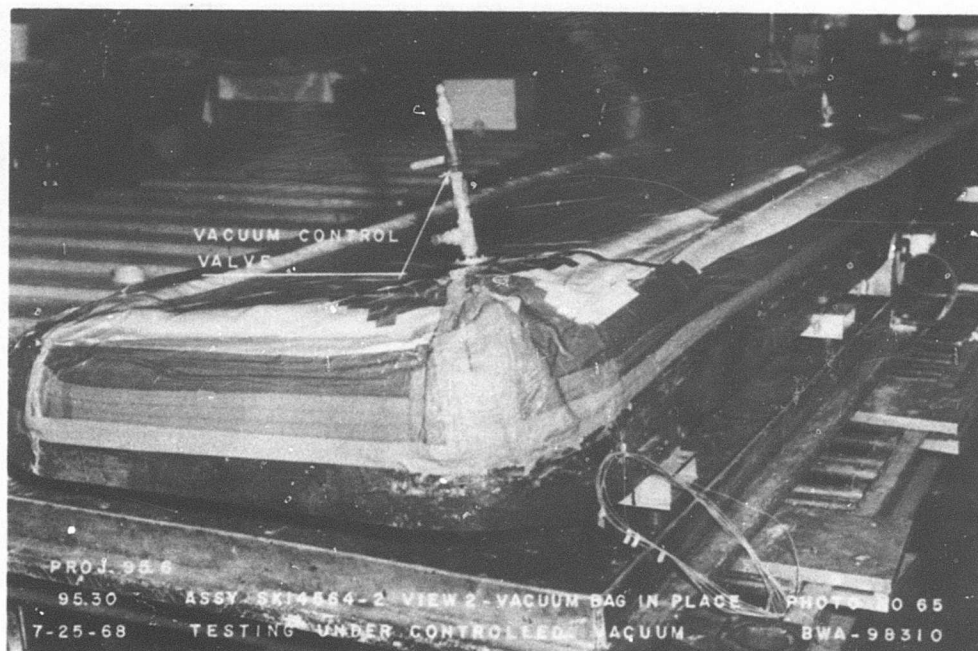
Tip-End View of Blade Assembly in Vacuum Bag for Cure of Outer Skins.
